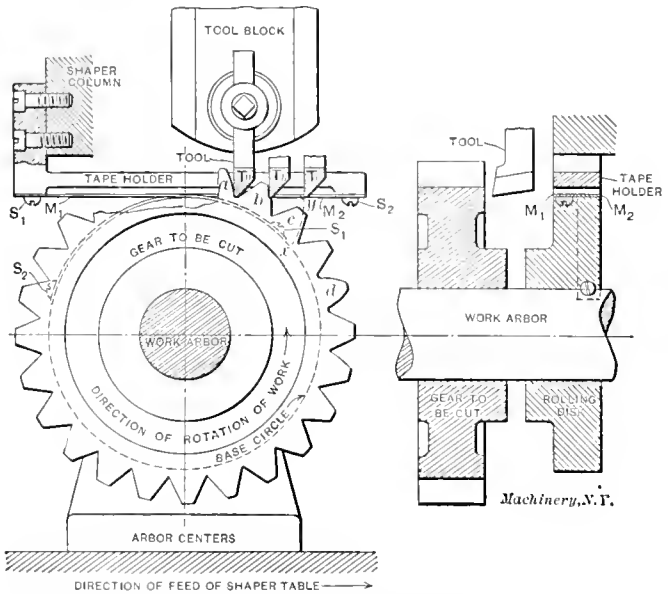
The Describing-Generating Process, by which the Point of the Tool is constrained to follow the Desired Outline.
